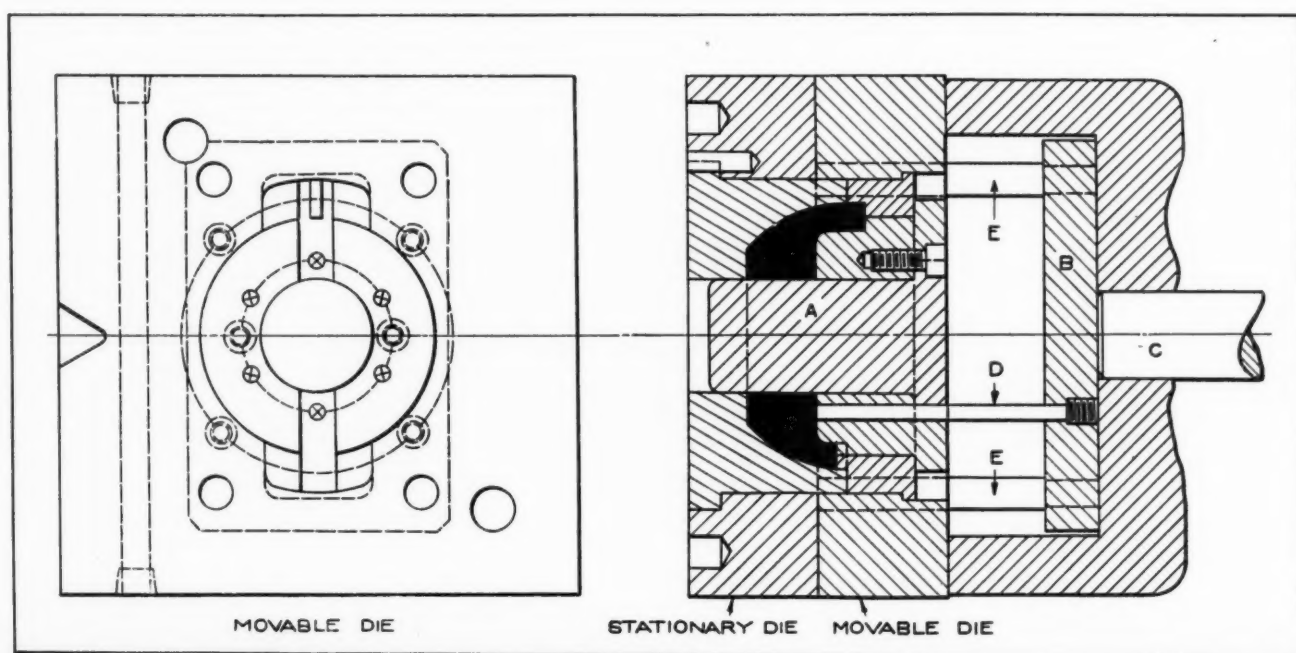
Dies Used to Produce Bowl-shaped Parts, Assembled in Pairs to Obtain a Universal Ball
